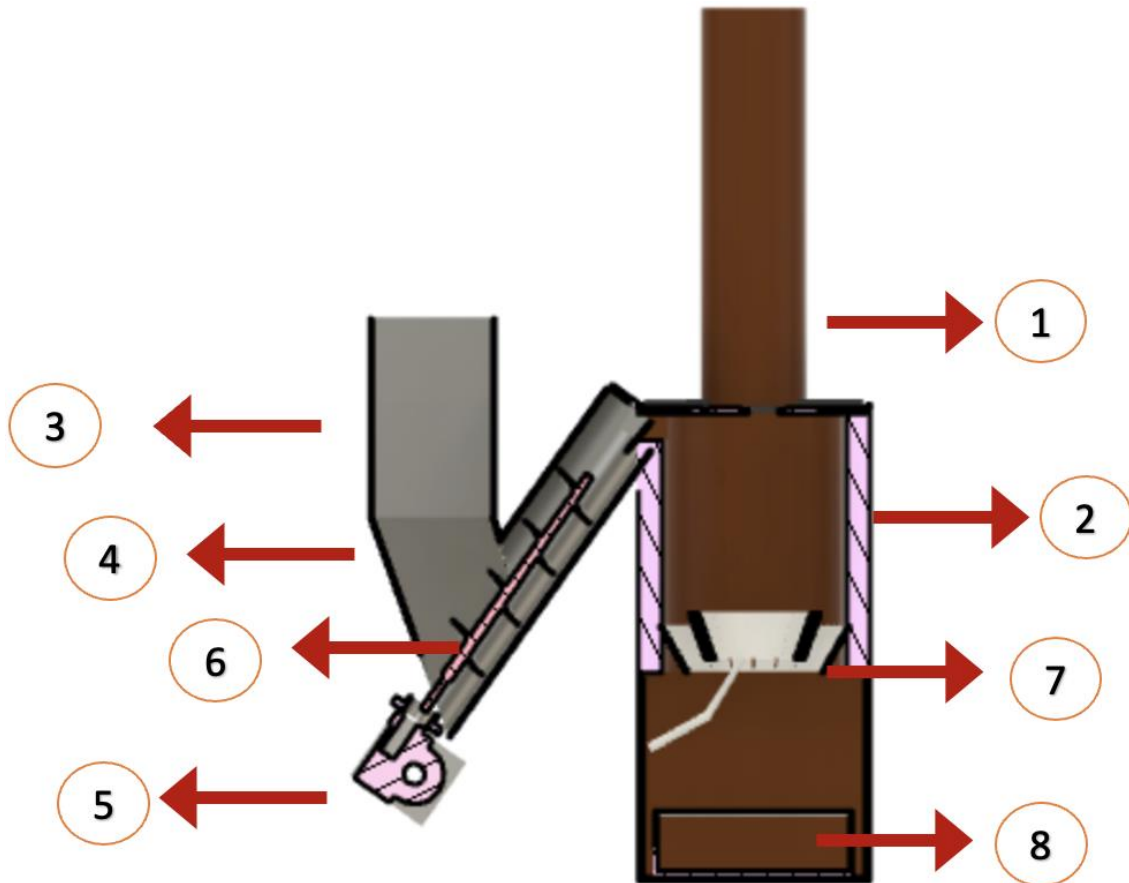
Old design of Ulzii stove, cross-sectional view
